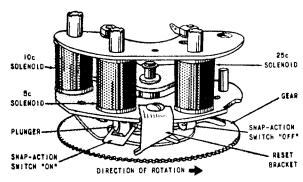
CREDIT SOLENOID & SWITCH ASSEMBLY.
